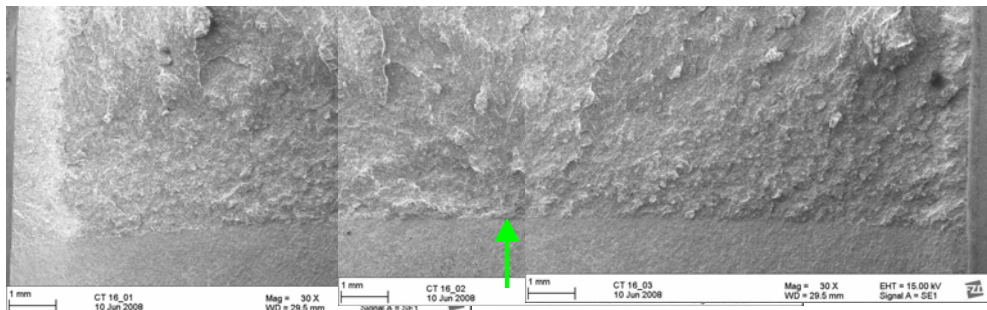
Fracture surface of specimen „CT16“, arrow indicating the crack initiation site.
